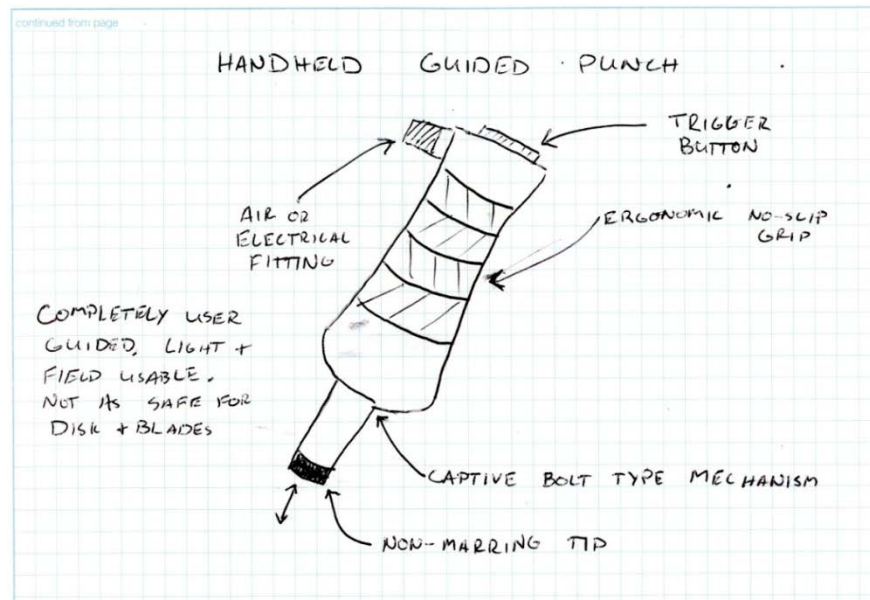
Hand drawing of the Handheld User Guided Punch design.
